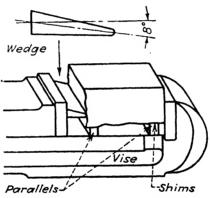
Using parallels, shims, and wedges to hold work in the vise.
